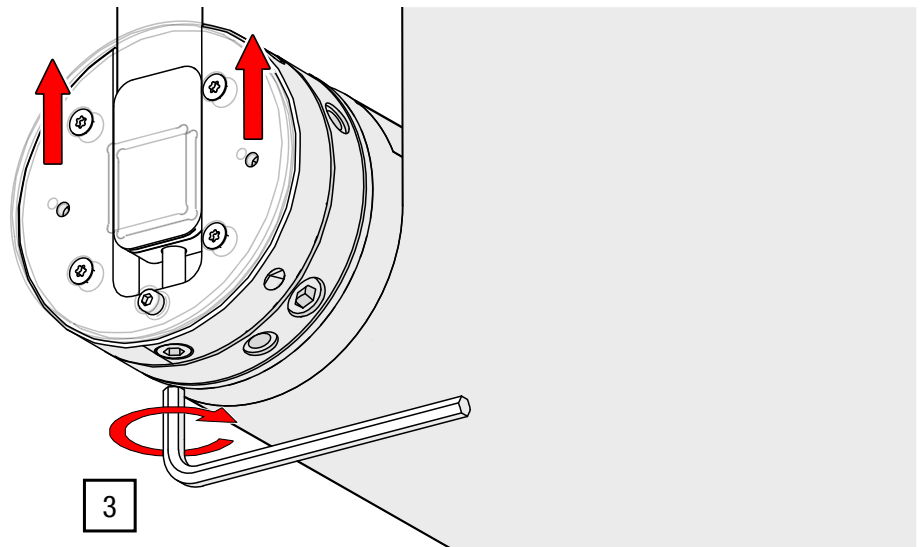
Setting the levelling – Adjusting the winding shaft upwards
